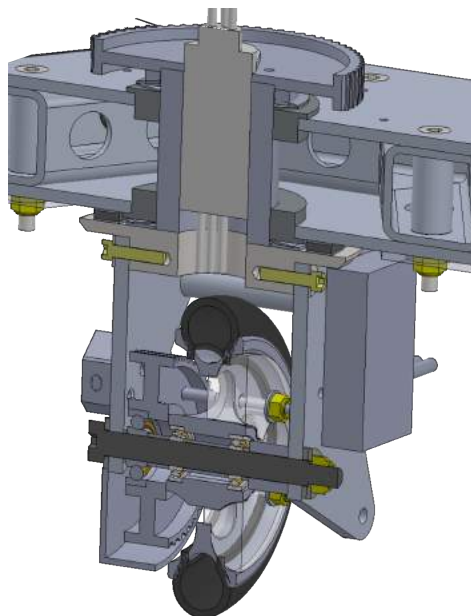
Cross Sectional View of the Wheel Assembly Installed in Chassis.
